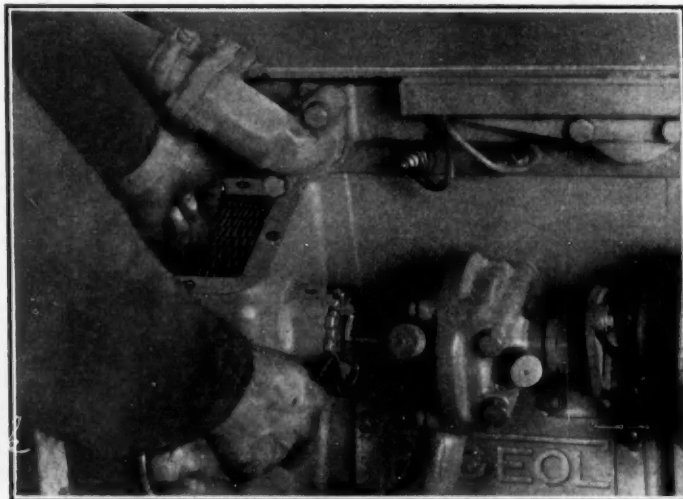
ADJUSTING FRONT-END CHAIN-DRIVE
